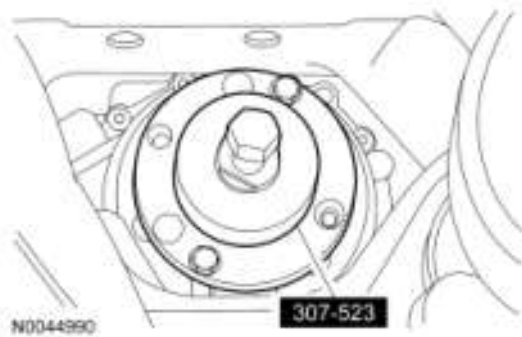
Removing Rear Output Shaft Flange Using Special Tool (307-523)
